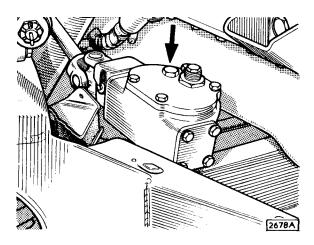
Steering Box Filler Plug (R.H.D.)
